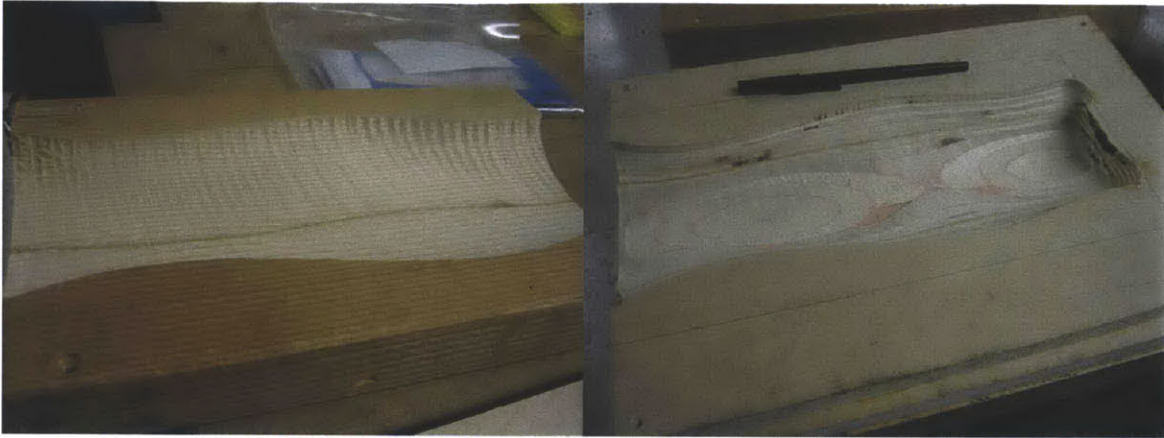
(Left) Ripples in the surface are still clearly visible in the mold because only the roughing toolpath was used. (Right) Both roughing and finishing toolpaths were used. There is a visible difference in surface smoothness from the finishing toolpath.
